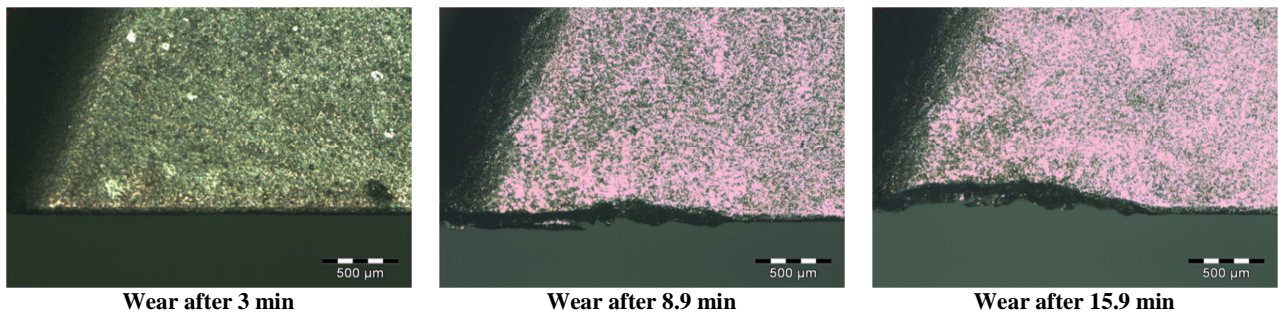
Wear scar progression under air blow cooling (dry cutting) conditions, machining Ti6Al4V with Mitsubishi inserts
